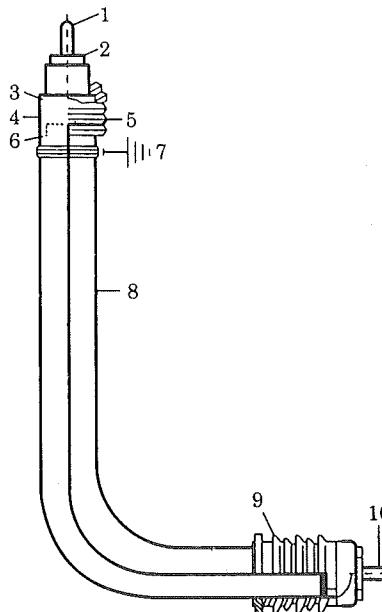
Construction of insulated busbar for indoor or outdoor application :
